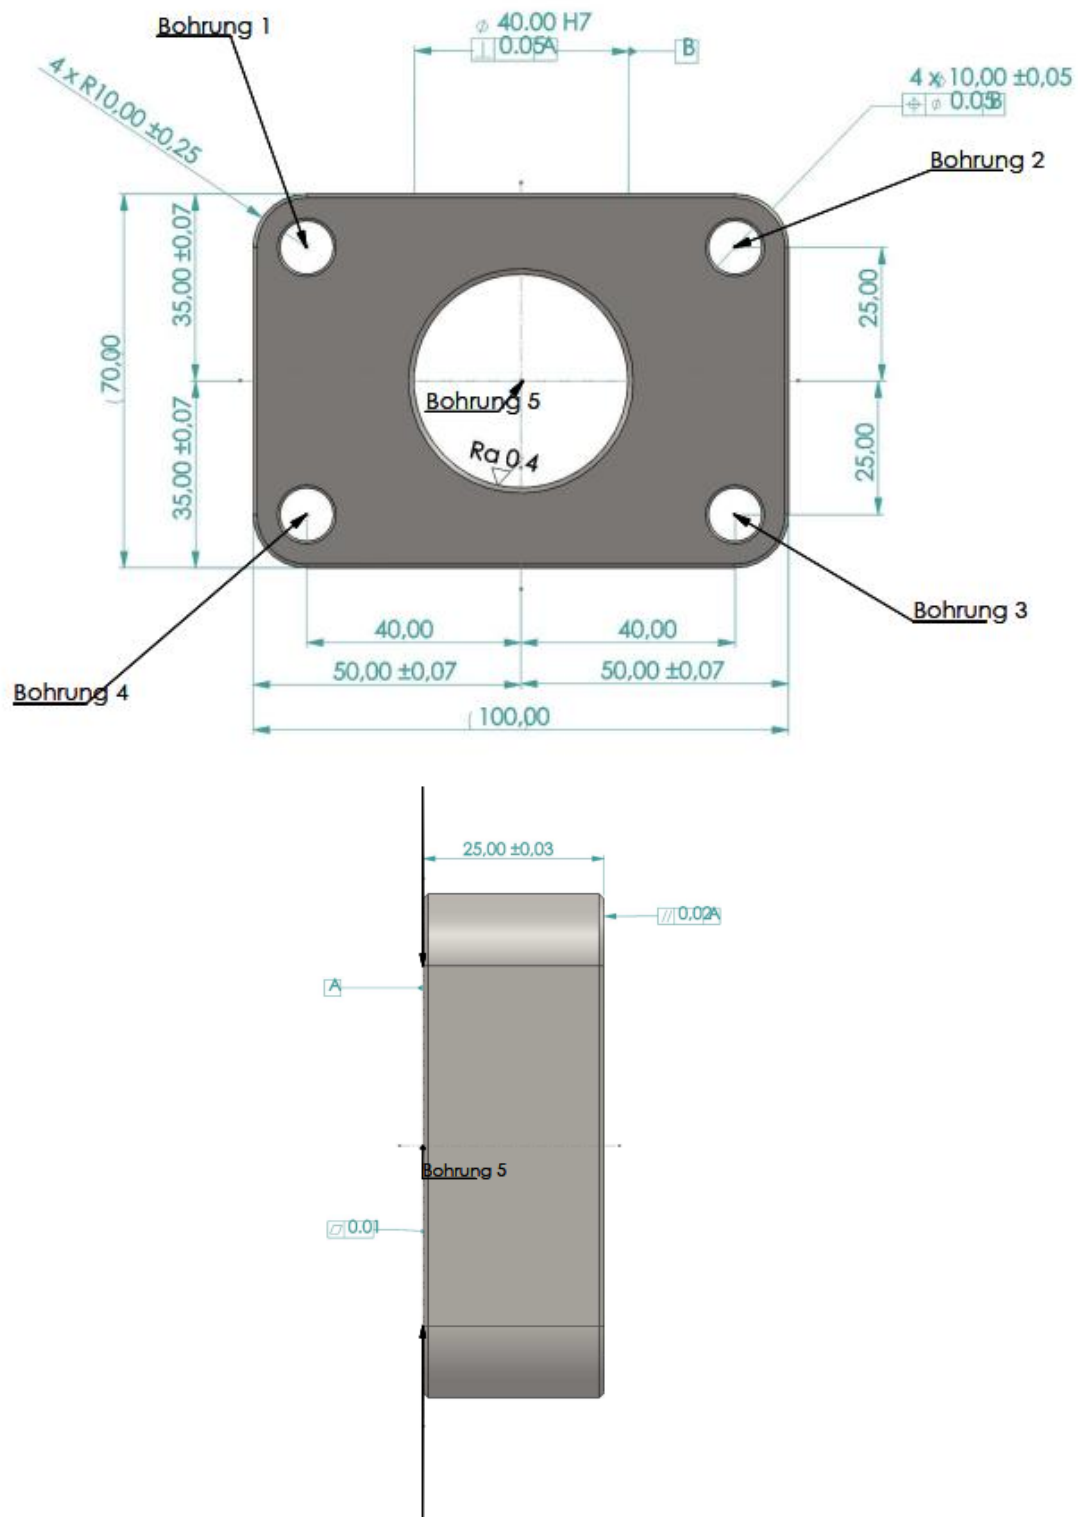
Drawing of a demonstrational Use Case Example by University of Bayreuth.
